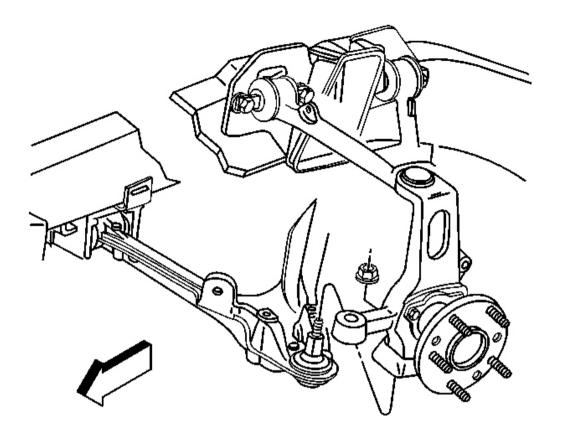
Lower Control Arm Ball Joint, Stud & Nuts Courtesy of GENERAL MOTORS CORP.
